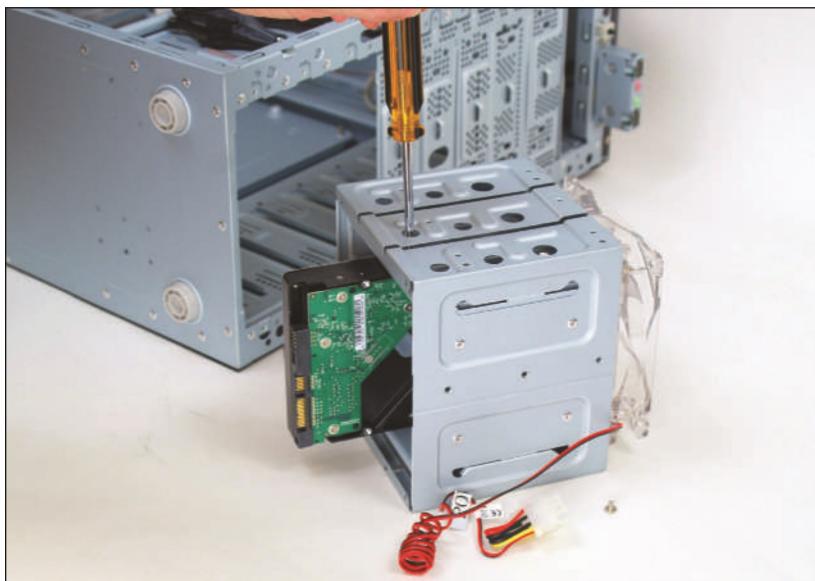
Install the hard drive in the bay using two screws on each side of the drive
